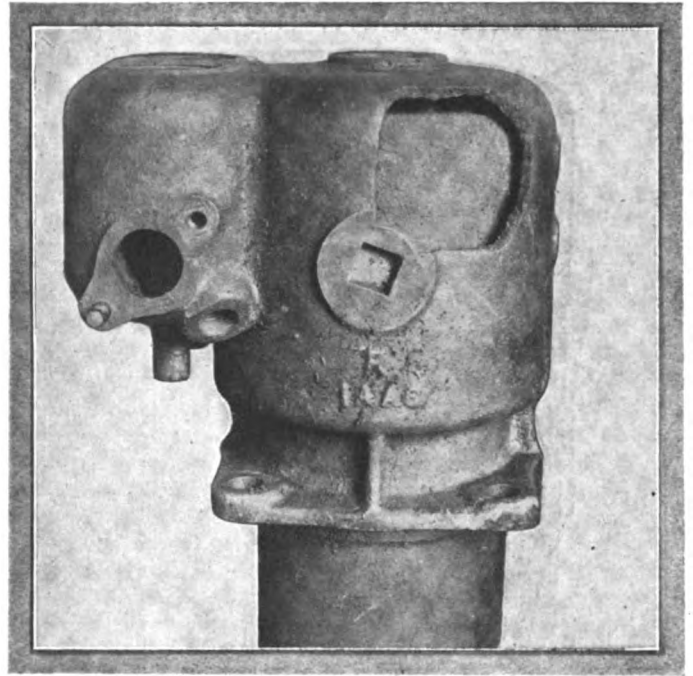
Broken water jacket which can be welded by the oxy-acetylene process if the missing part is not lost
